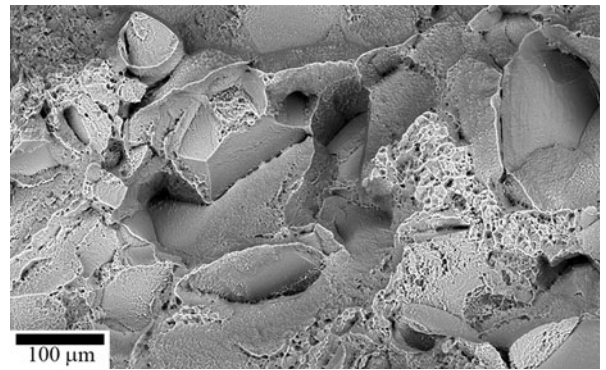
Fracture surface from one tensile test. Significant amounts of intergranular fracture occurred.
